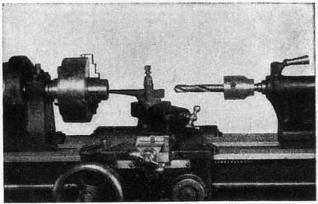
Drilling and Boring Steel Gear Blanks in the Chuck of an 11-inch Quick Change Gear Lathe
